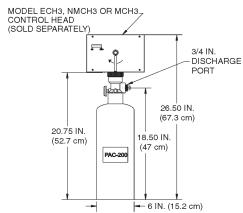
Model PAC-200 Pneumatic Actuating Cylinder.
